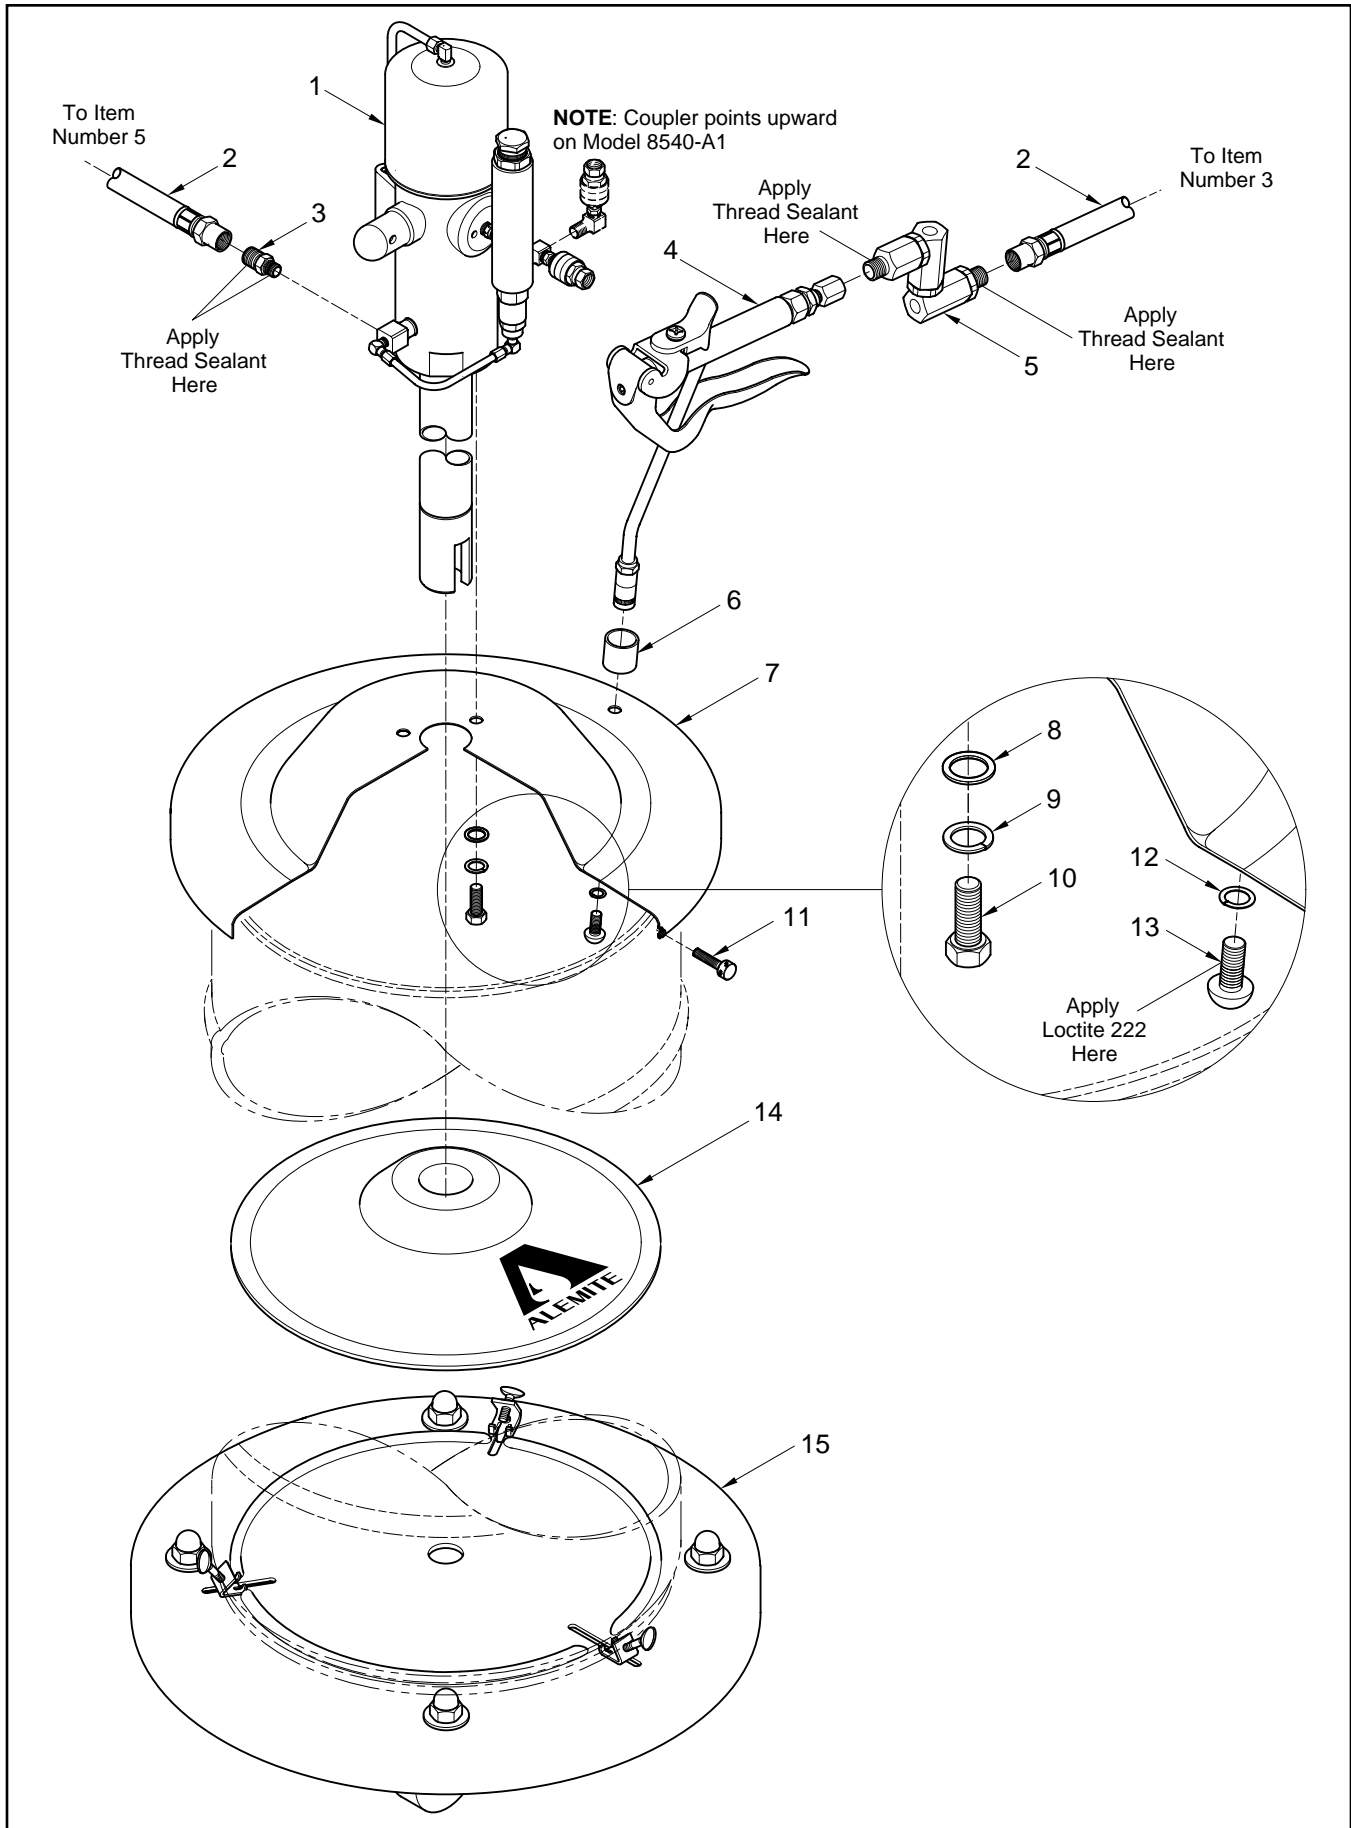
High-Pressure Lubricant Pump (Stationary and Portable) Models 8540-A1 and 8541-5 - Exploded View
